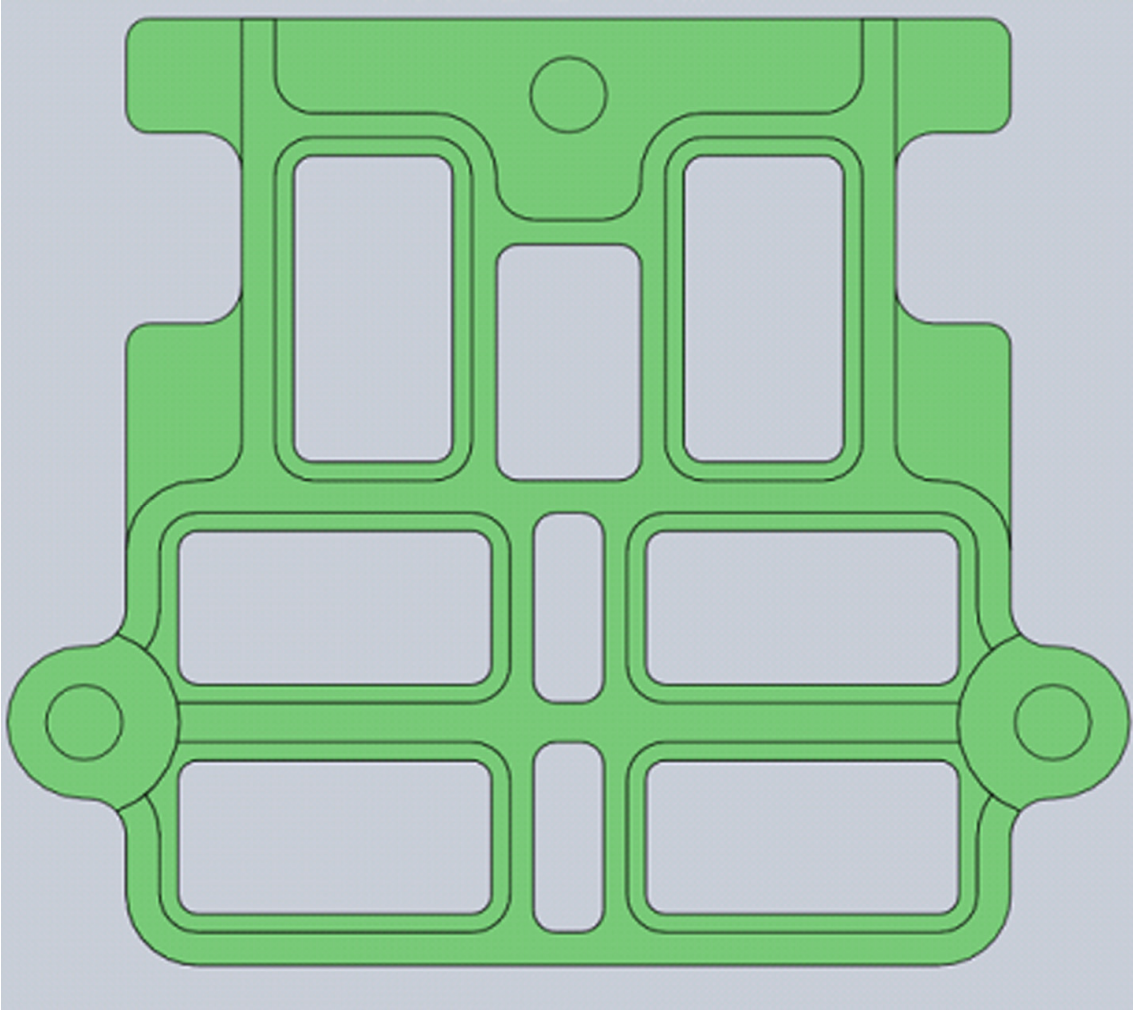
A bottom view of the 3-D drawing of the platen's frame.
